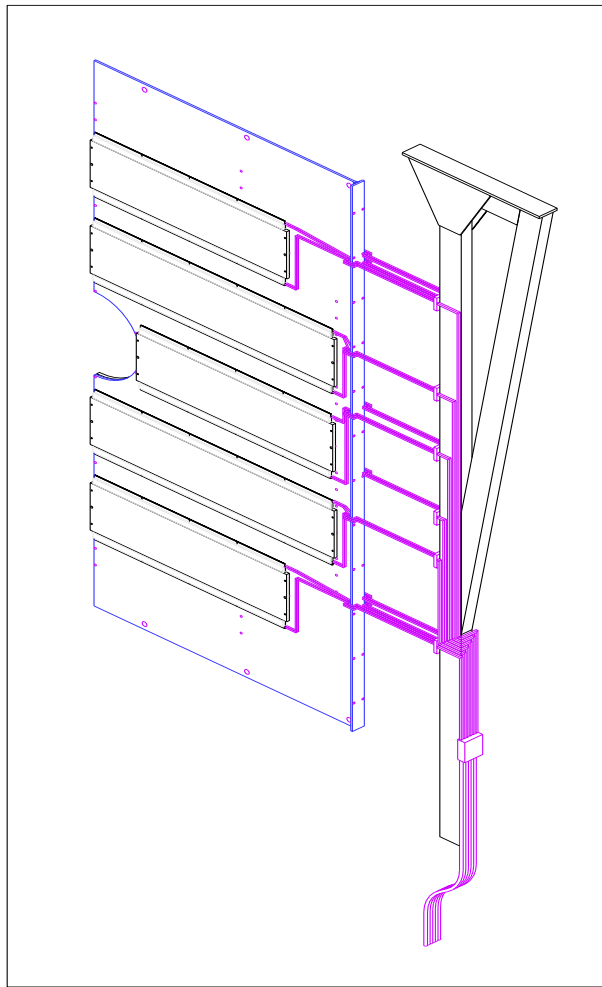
Station 4 (1/2 chamber 7 or 8) : principle of LV cables on slats : 6 cables of $5 \times 16 \text{ mm}^2$ are divided in cables of smaller sections.
